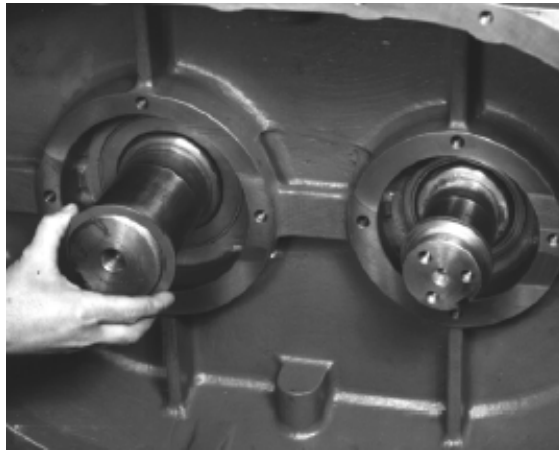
SLIDE SHIMS OVER SHAFT ASSEMBLY
